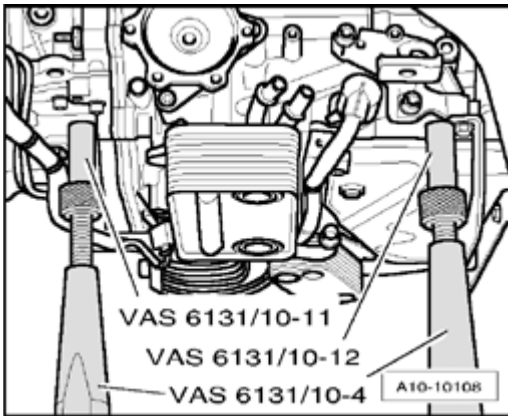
Support Elements VAS 6131/10-11 And VAS 6131/10-12 Downward At Left Of Engine/Transmission Assembly
